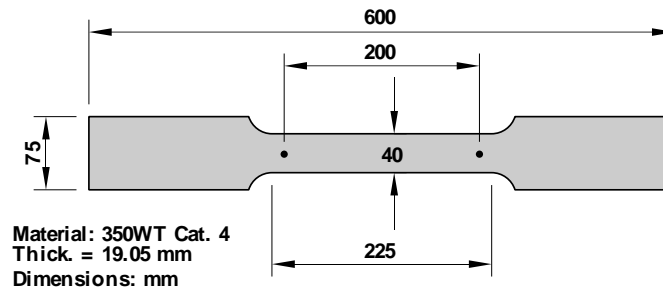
Nominal geometry of the coupons machined from the core plates.
